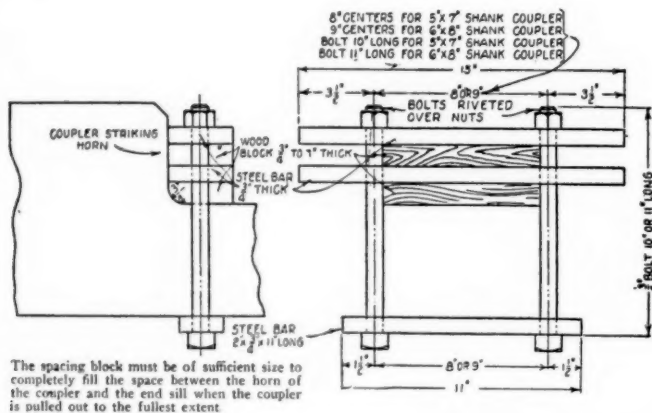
A—Composite Spacing Block for Twin or Triple Loaders—Alternative Arrangement
